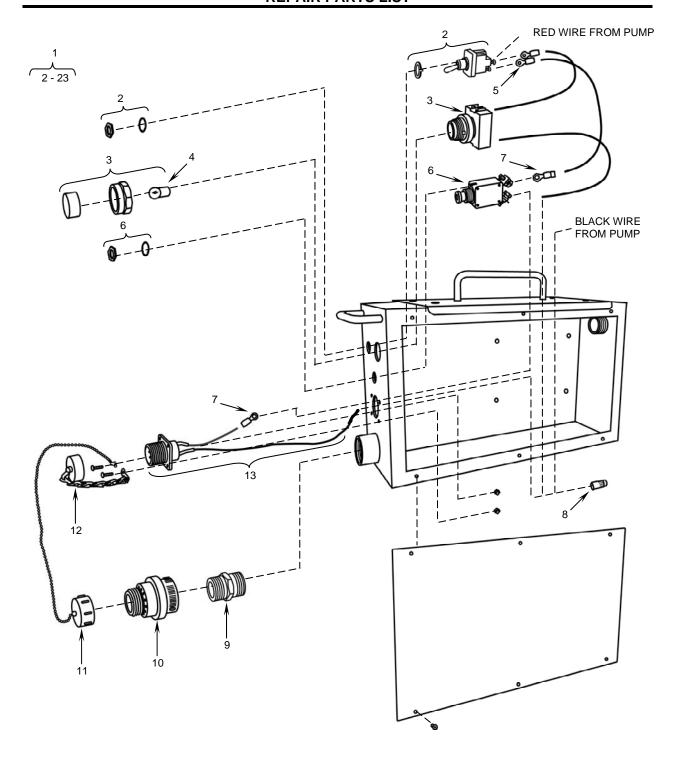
Fill Pump Assembly. (Sheet 1 of 2)
